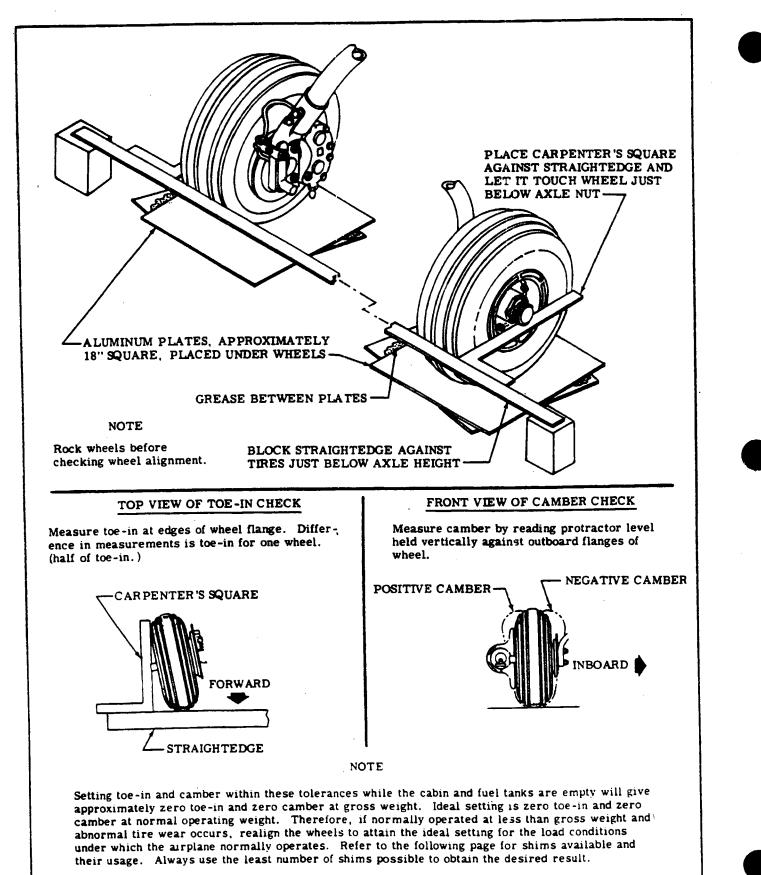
A-11 Wheel Alignment (Sheet 1 of 2)
